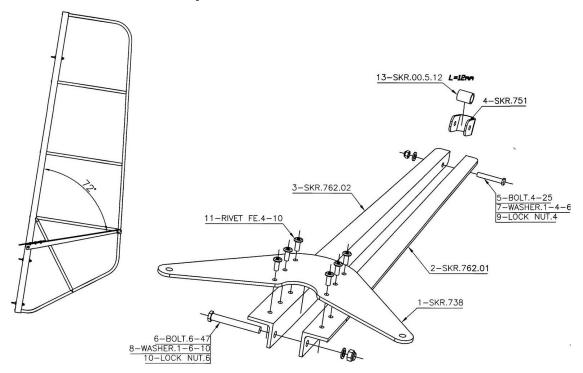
rudder horn assembly (note: Skyranger classic rudder frame shown. Swift2 Rudder is slightly different shape).
